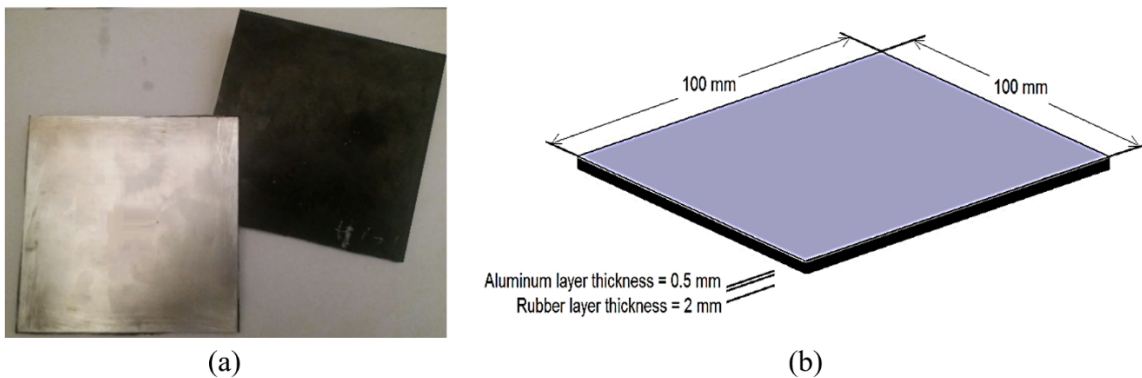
(a) Aluminum-rubber specimens (b) Dimension of specimens
